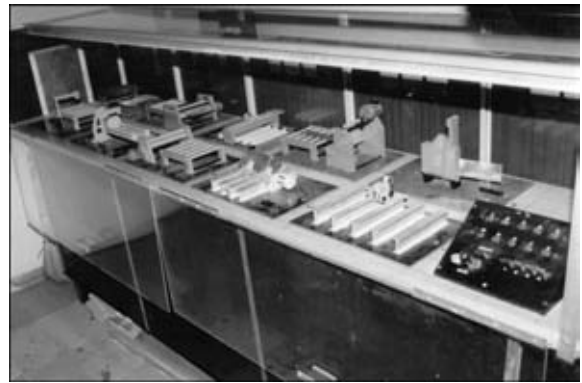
Mock-ups of mechanical and welding equipment for fabrication of I-beams (production line)
